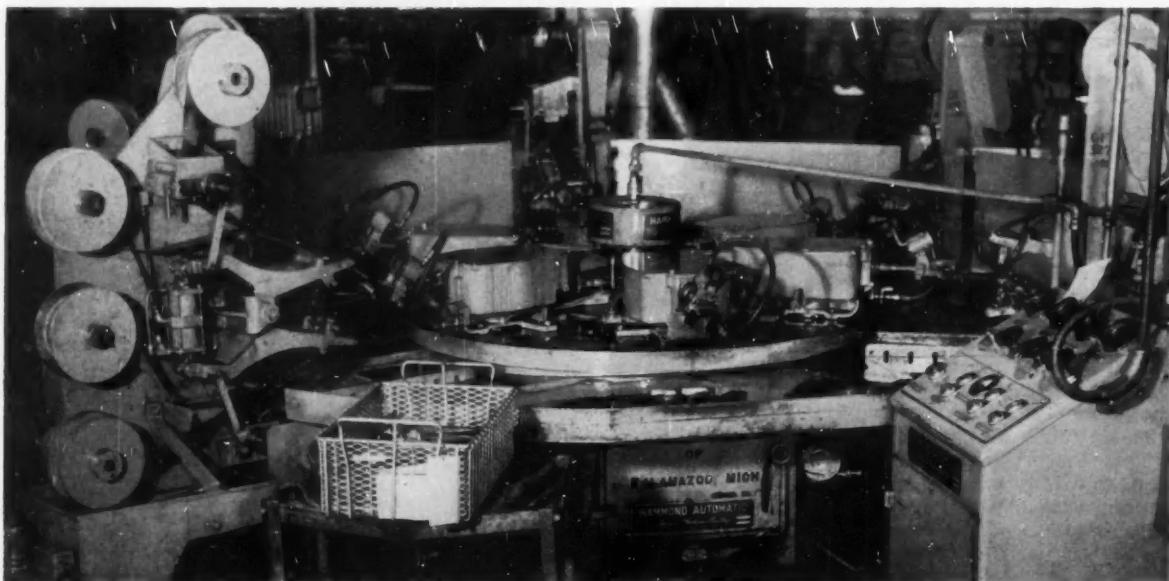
A machine with six horizontal reciprocating heads mounted on a table was developed to polish the blade shown in Fig. 6
